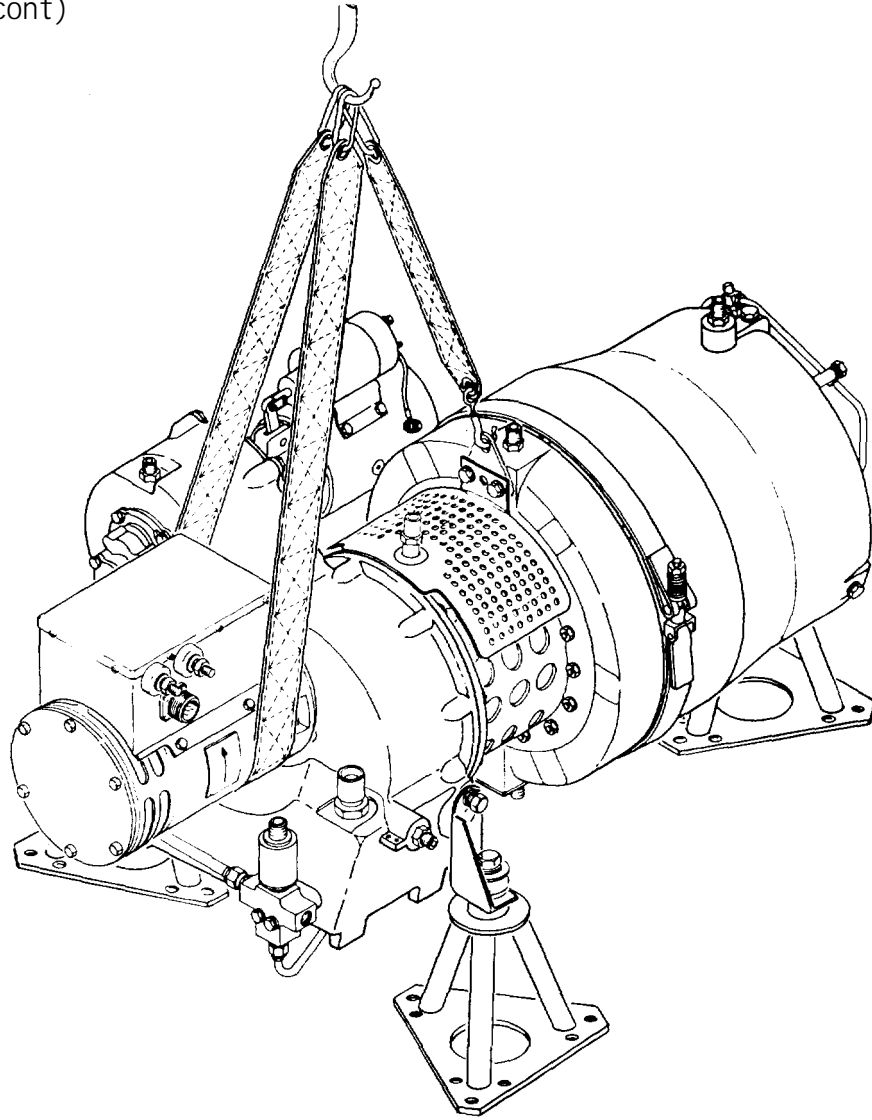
Engine and Gearbox Replacement (Sheet 3 of 3)
